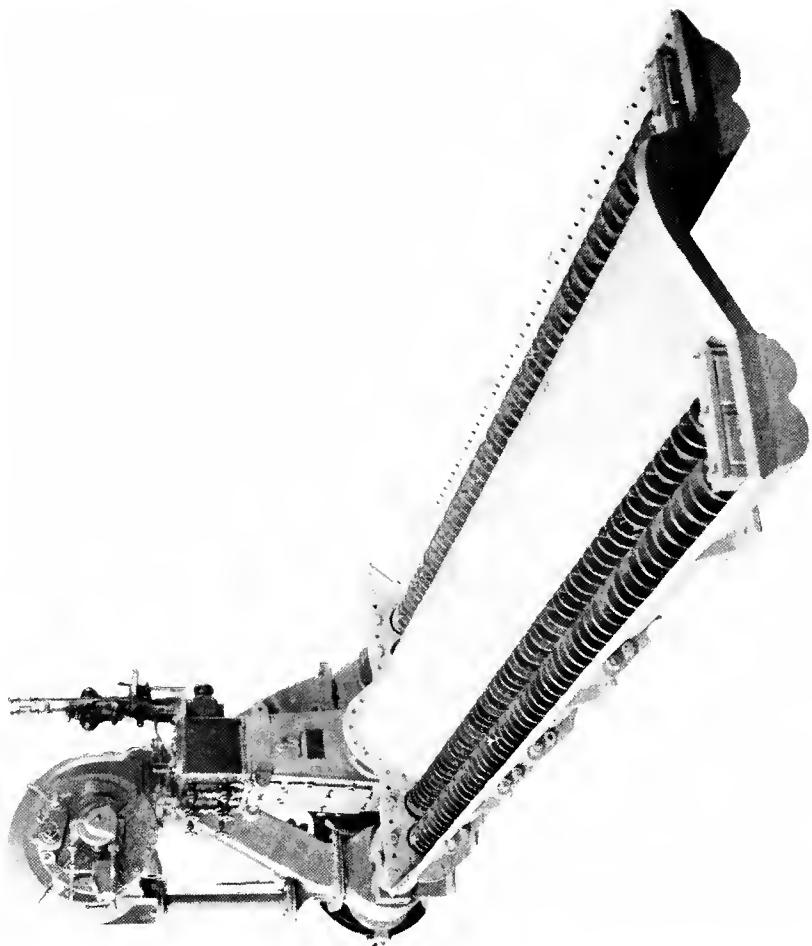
ASSEMBLY OF FULLER LOCOMOTIVE EQUIPMENT, TYPE A, SECTION SHOWING COMPLETE BASE FOR PULVERISED COAL TANK, THE SIDES OF WHICH ARE BOLTED TO THIS CAST IRON BOTTOM SECTION.
